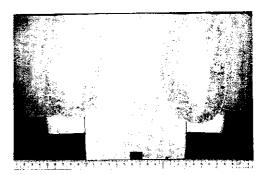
An example of macro-etch specimen for CES welding crack test
